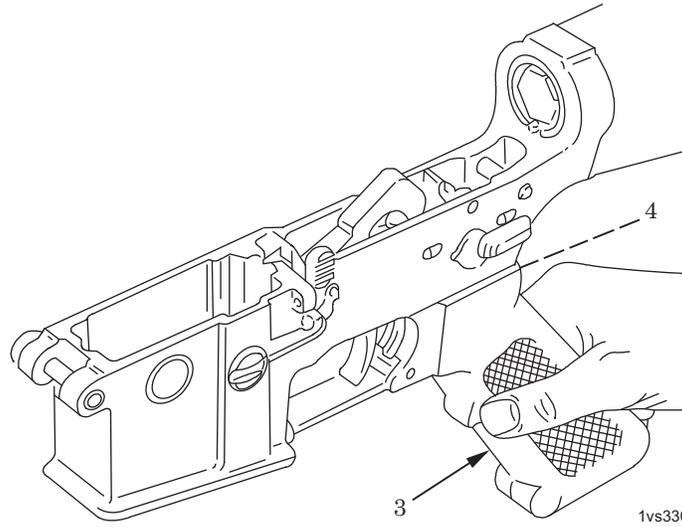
Positioning Pistol Grip with Lock Plate Removed.
